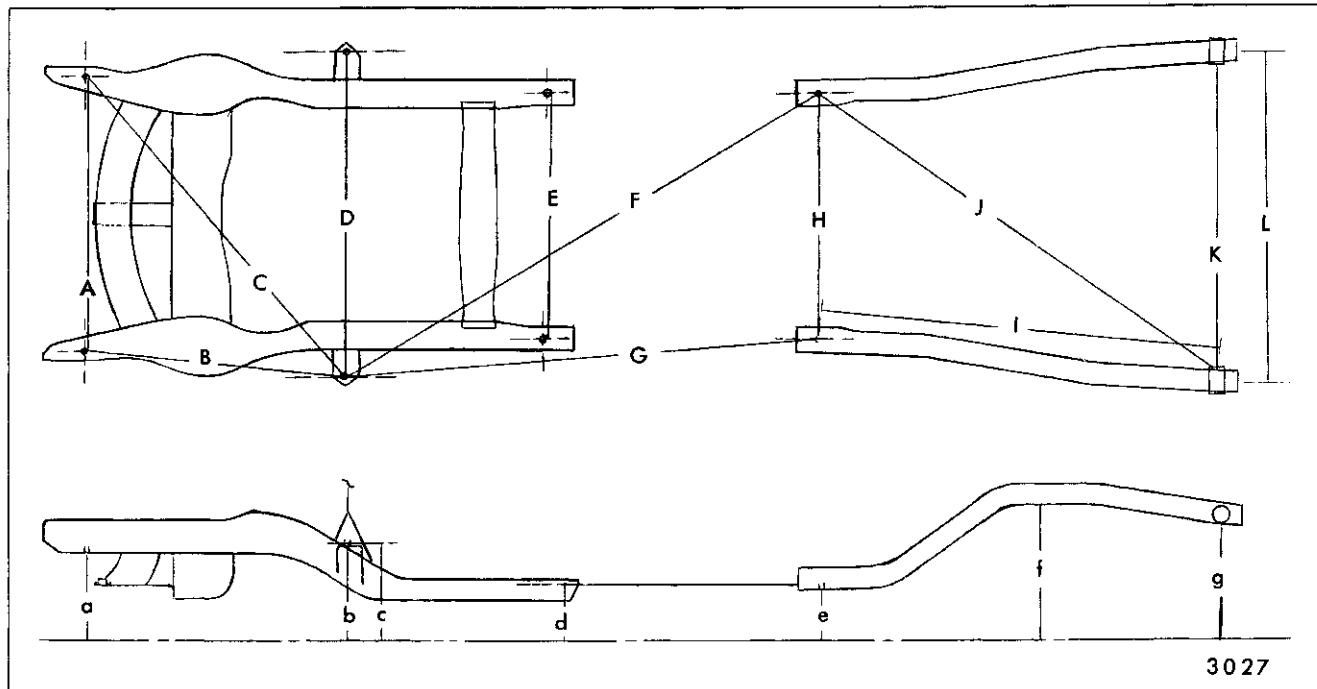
Horizontal & Vertical Checking Dimensions (Camaro & Firebird "F" Bodies)
